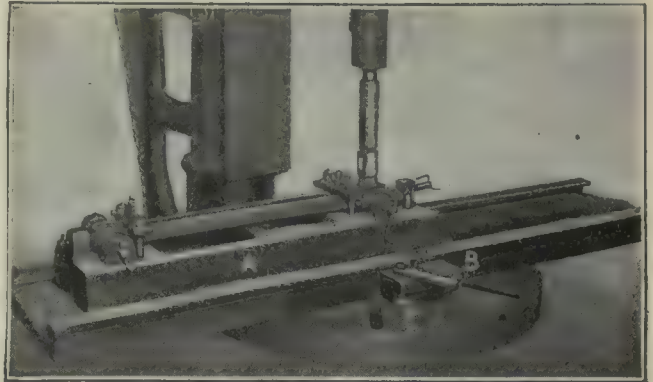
SLIDING DRILL JIG FOR CONNECTING RODS
